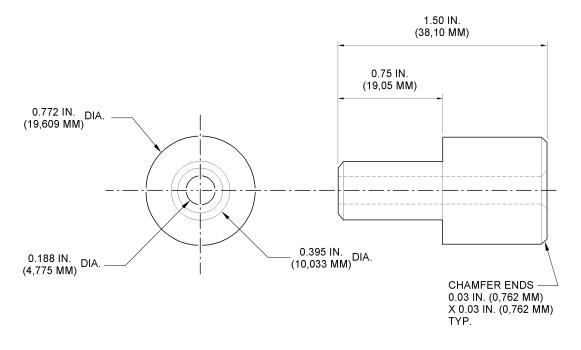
Anti-Drive End Armature Shaft Adapter
